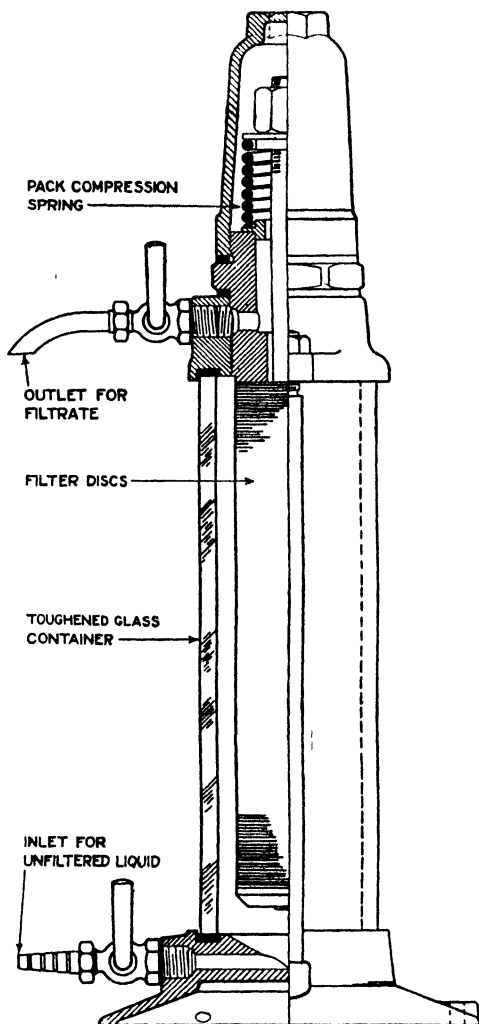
CONSTRUCTIONAL VIEW OF FILTER.
